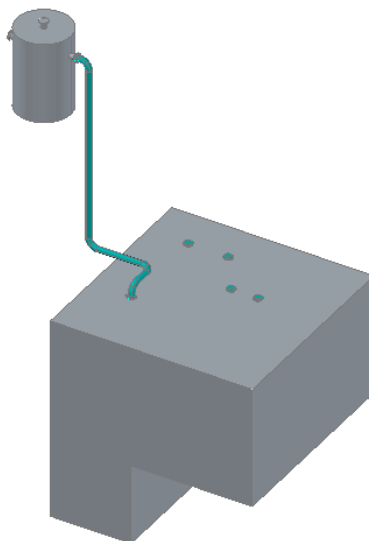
Pipe added between bottom nozzle of the Boiler Drum and inlet nozzle of the Evaporator unit on the Boiler
